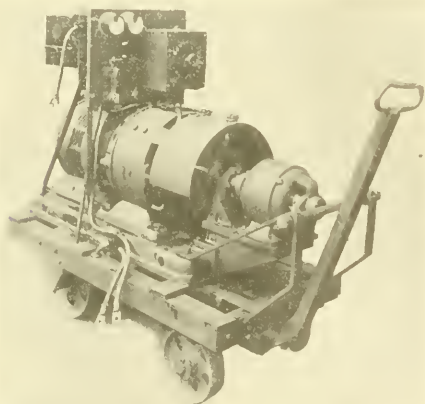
SINGLE-OPERATOR WELDING EQUIPMENT
